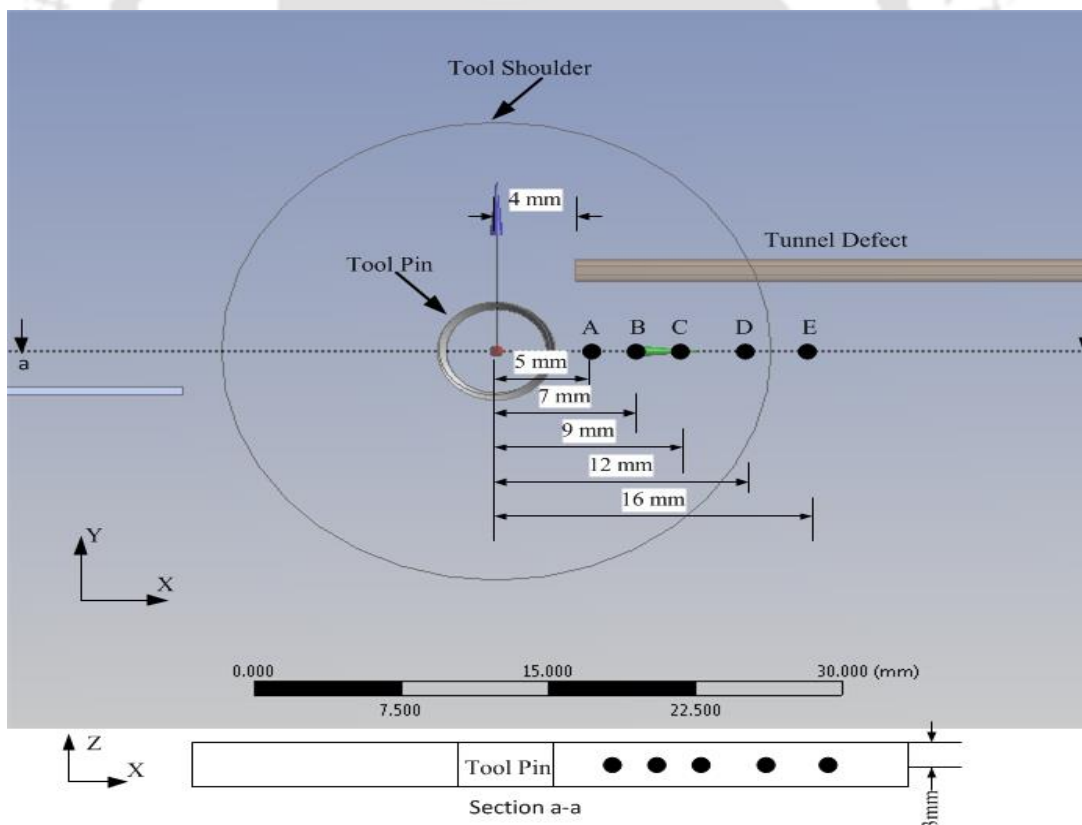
Measurement of tunnel defect formed during the welding.
